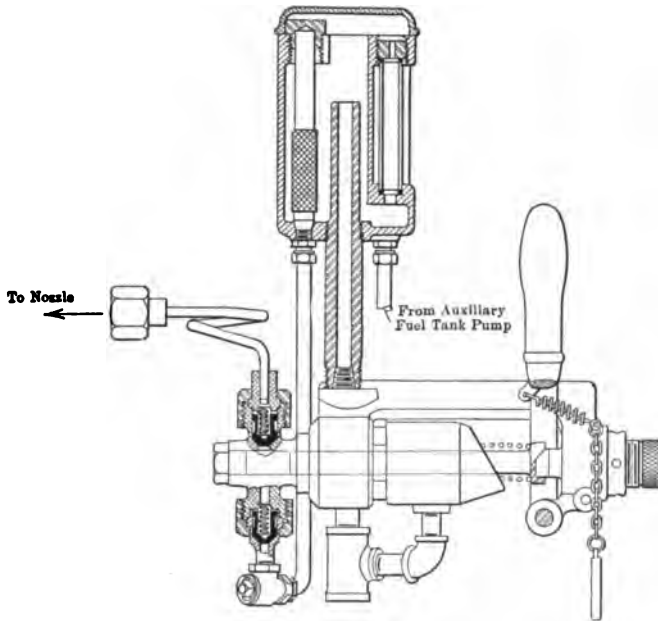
Fairbanks-Morse type "Y" horizontal engine fuel pump.
